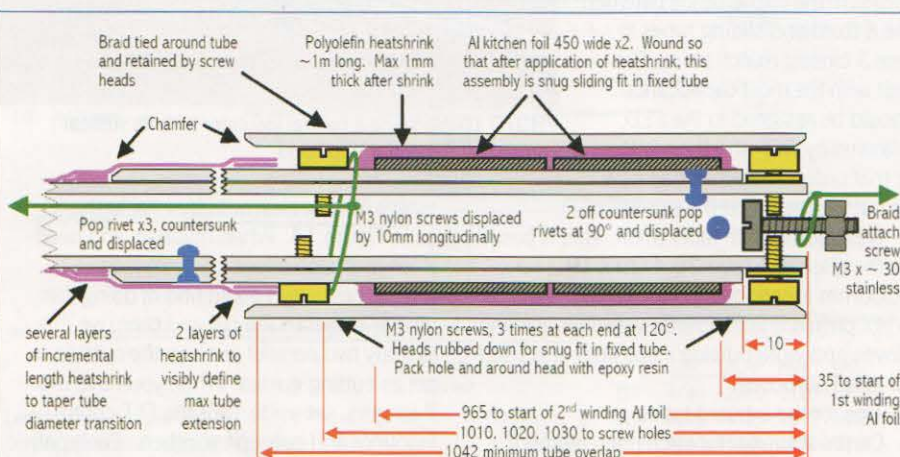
Details of assembly to form a dielectric-filled gap between fixed inboard and sliding tubes with minimal trapped air. Also shown are nylon bearings (M3 screws) to hold the sliding tube straight and true within the fixed tube. All dimensions are mm.
